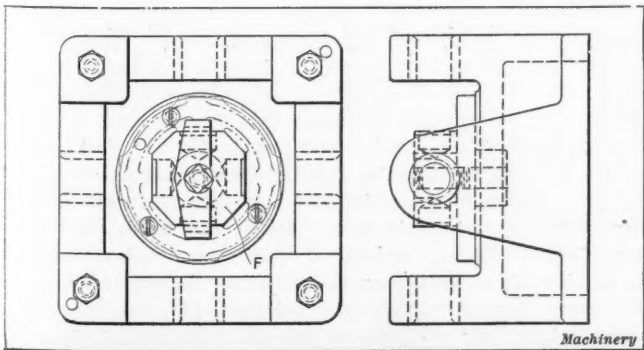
Jig used for drilling the Four Holes in the Forgings
